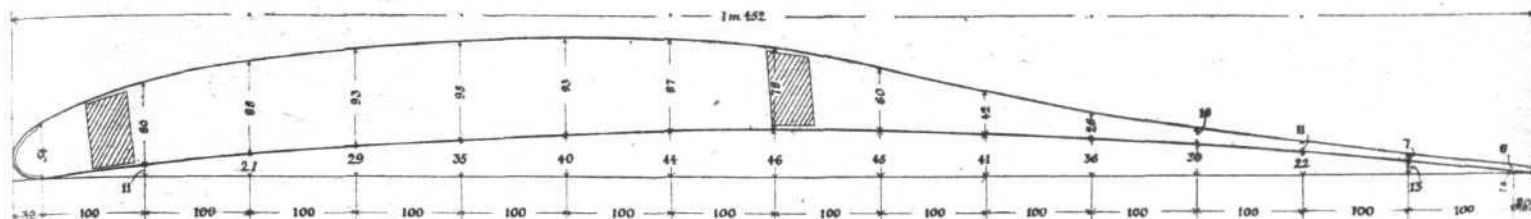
Wing section of the Berg single-seater. All the dimensions are in mm.
